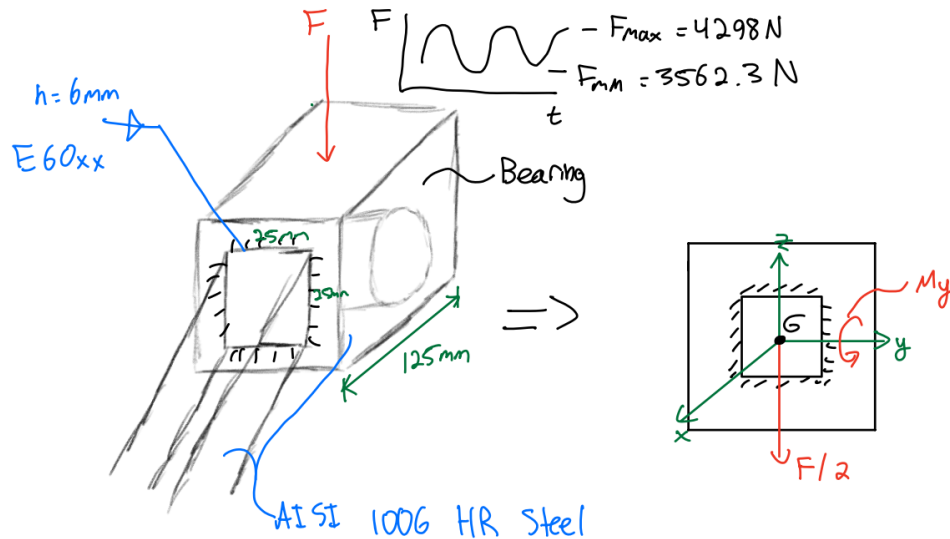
3D Diagram of Welded Bearing with Loads
